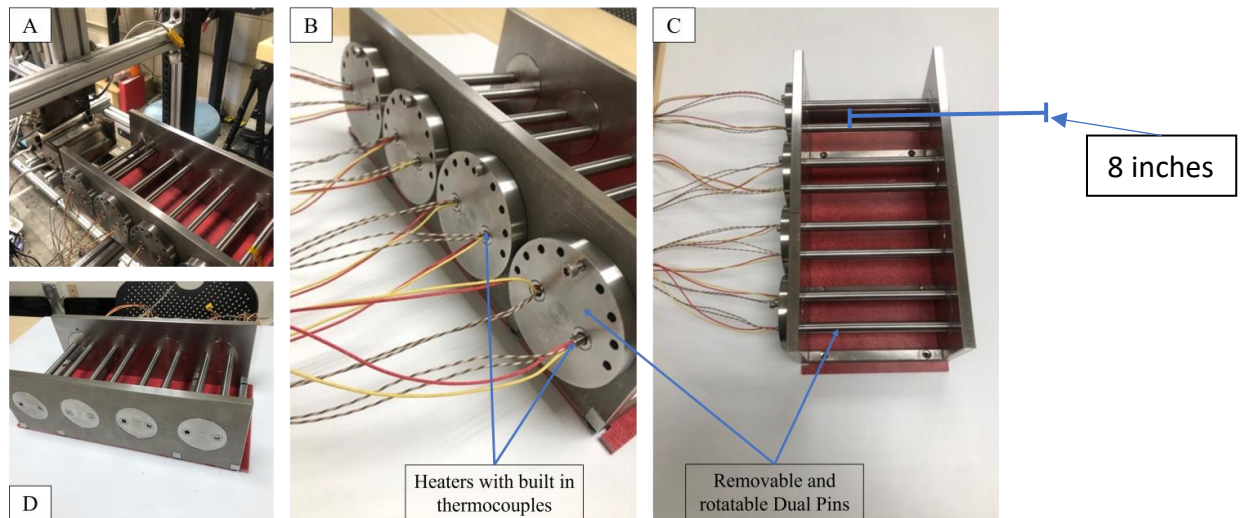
New Pin Die System. (a) View of Pin die system mounted onto the tape impregnation (b) Front side view showing heater and thermocouple wires inserted into rotating pins. Pins can be turned and locked into places at intervals of 22.5° covering a 180° operational window. (c). Top view (d) Back side view
